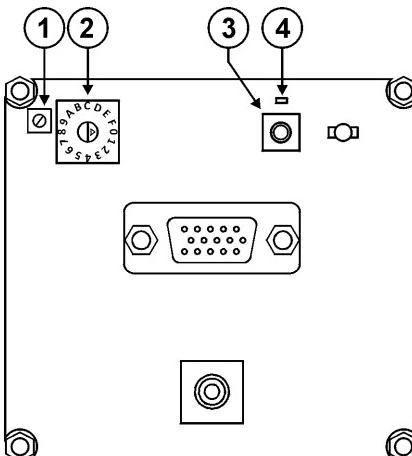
WP-101 PCB Assembly Front View with Face Plate Removed
